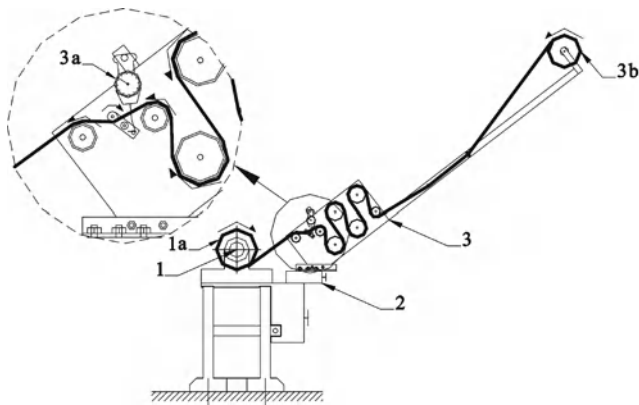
Schematic diagram of the yarn winding equipment. 1-rotating specimen fixture; 1a-specimen; 2-horizontal platform, moving along the longitudinal axis of the specimen; 3-pre-tension device attached to the platform 2; 3a-dynamometer; 3b-yarn bobbin
